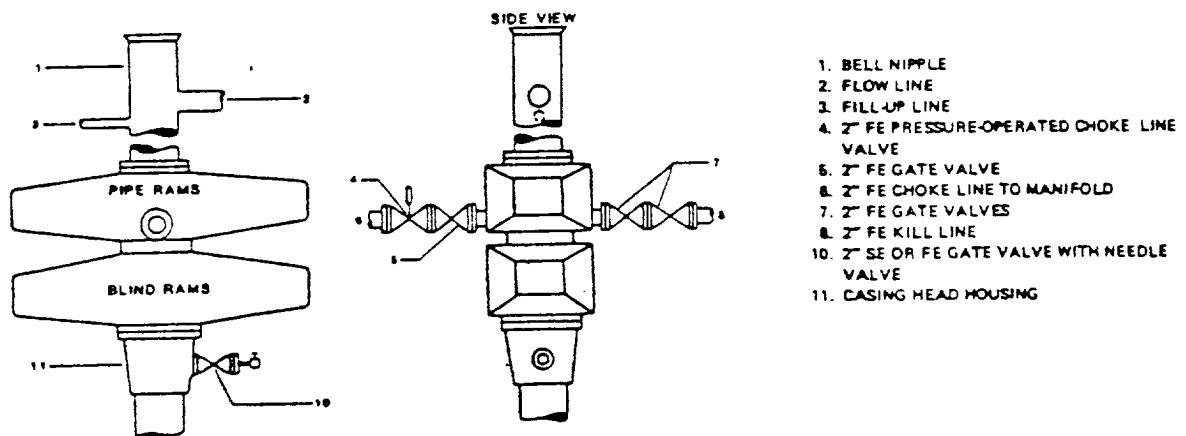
Standard Hydraulic Blowout Preventer Assembly (2 M or 3 M Working Pressure) Alternative 3 (without Drilling Spool)
